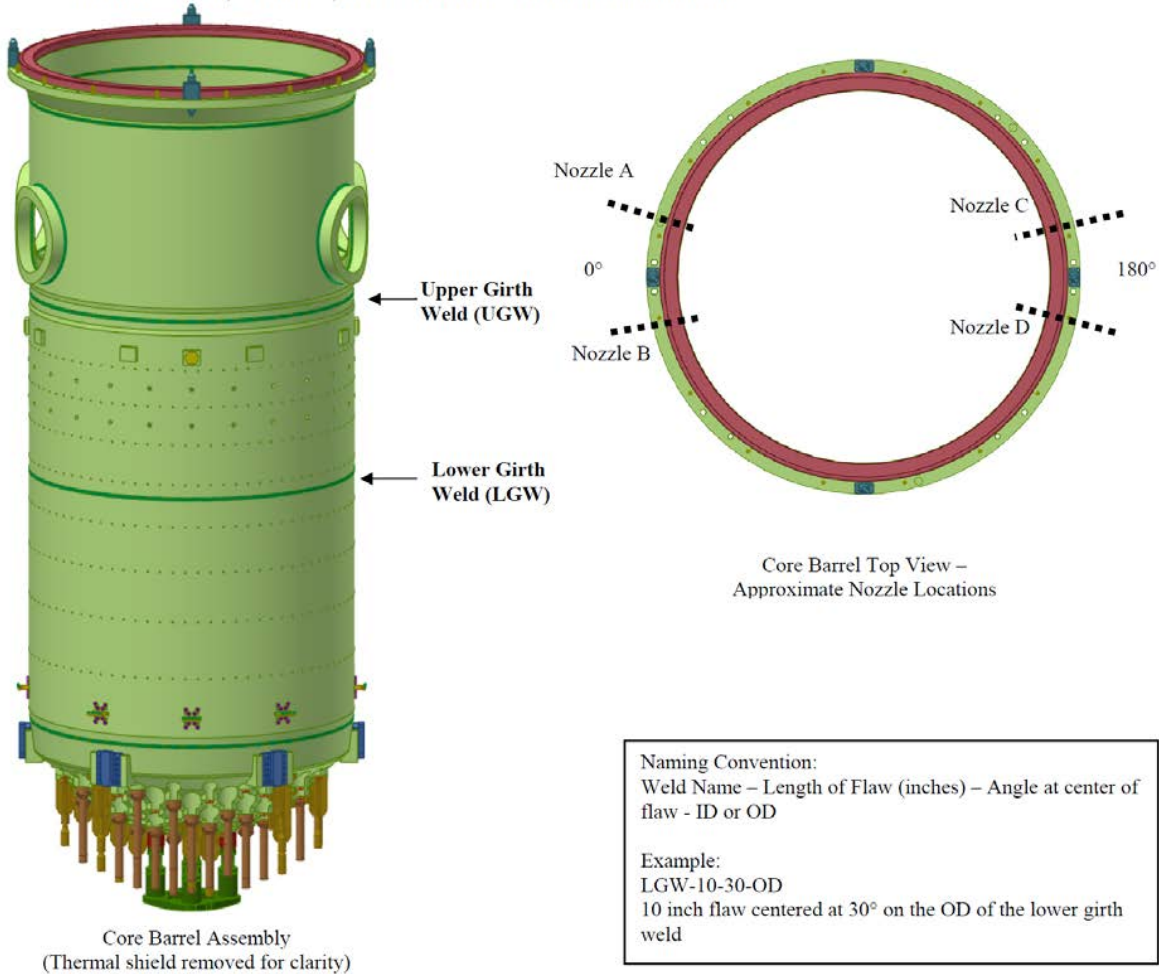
IP2-CID-0031 Core Barrel Assembly – Core Barrel Outlet Nozzle Welds
